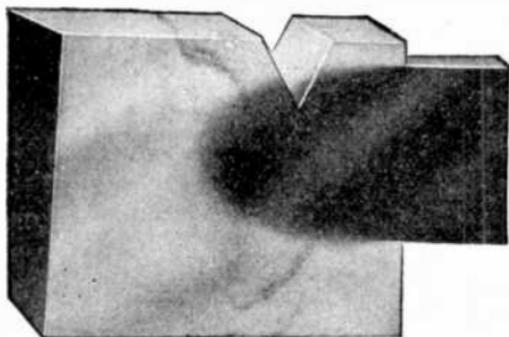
,672.—Section of Fairbanks-Morse "cast-on" joint showing union of end ring and inductor. The view shows the V-shape inspection groove as described in fig. 2,700.
